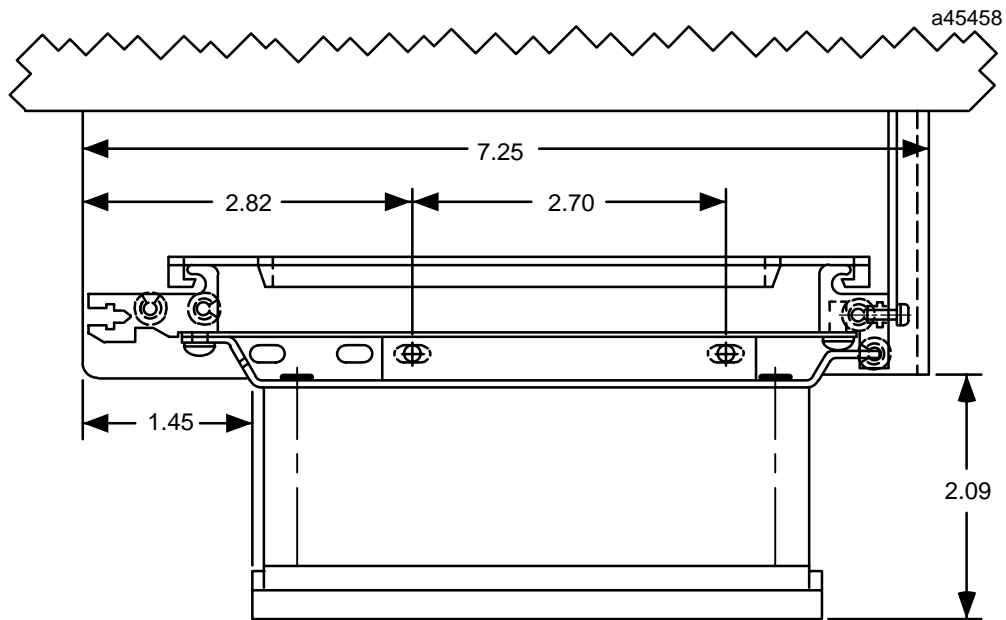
Rack Fan Assembly Dimensions for Mounting
